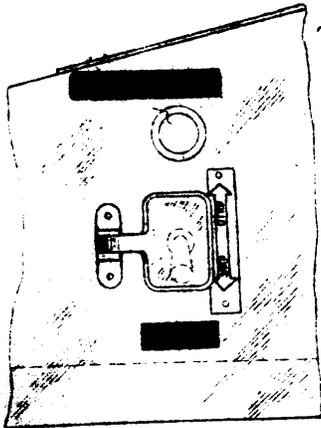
Assembly diagram of the power supply of the photo equipment.
